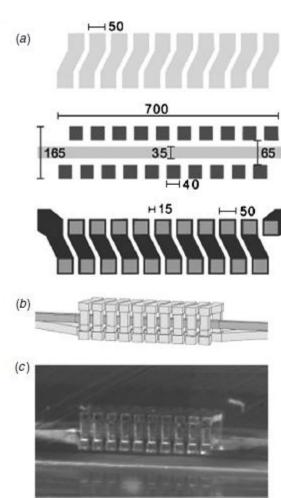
(a) CAD drawing of three individual layers used in constructing the coils. Dimensions listed are in μ m. (b) CAD drawing of a finished coil assembly. (c) Optical microscope image of a completed coil.
